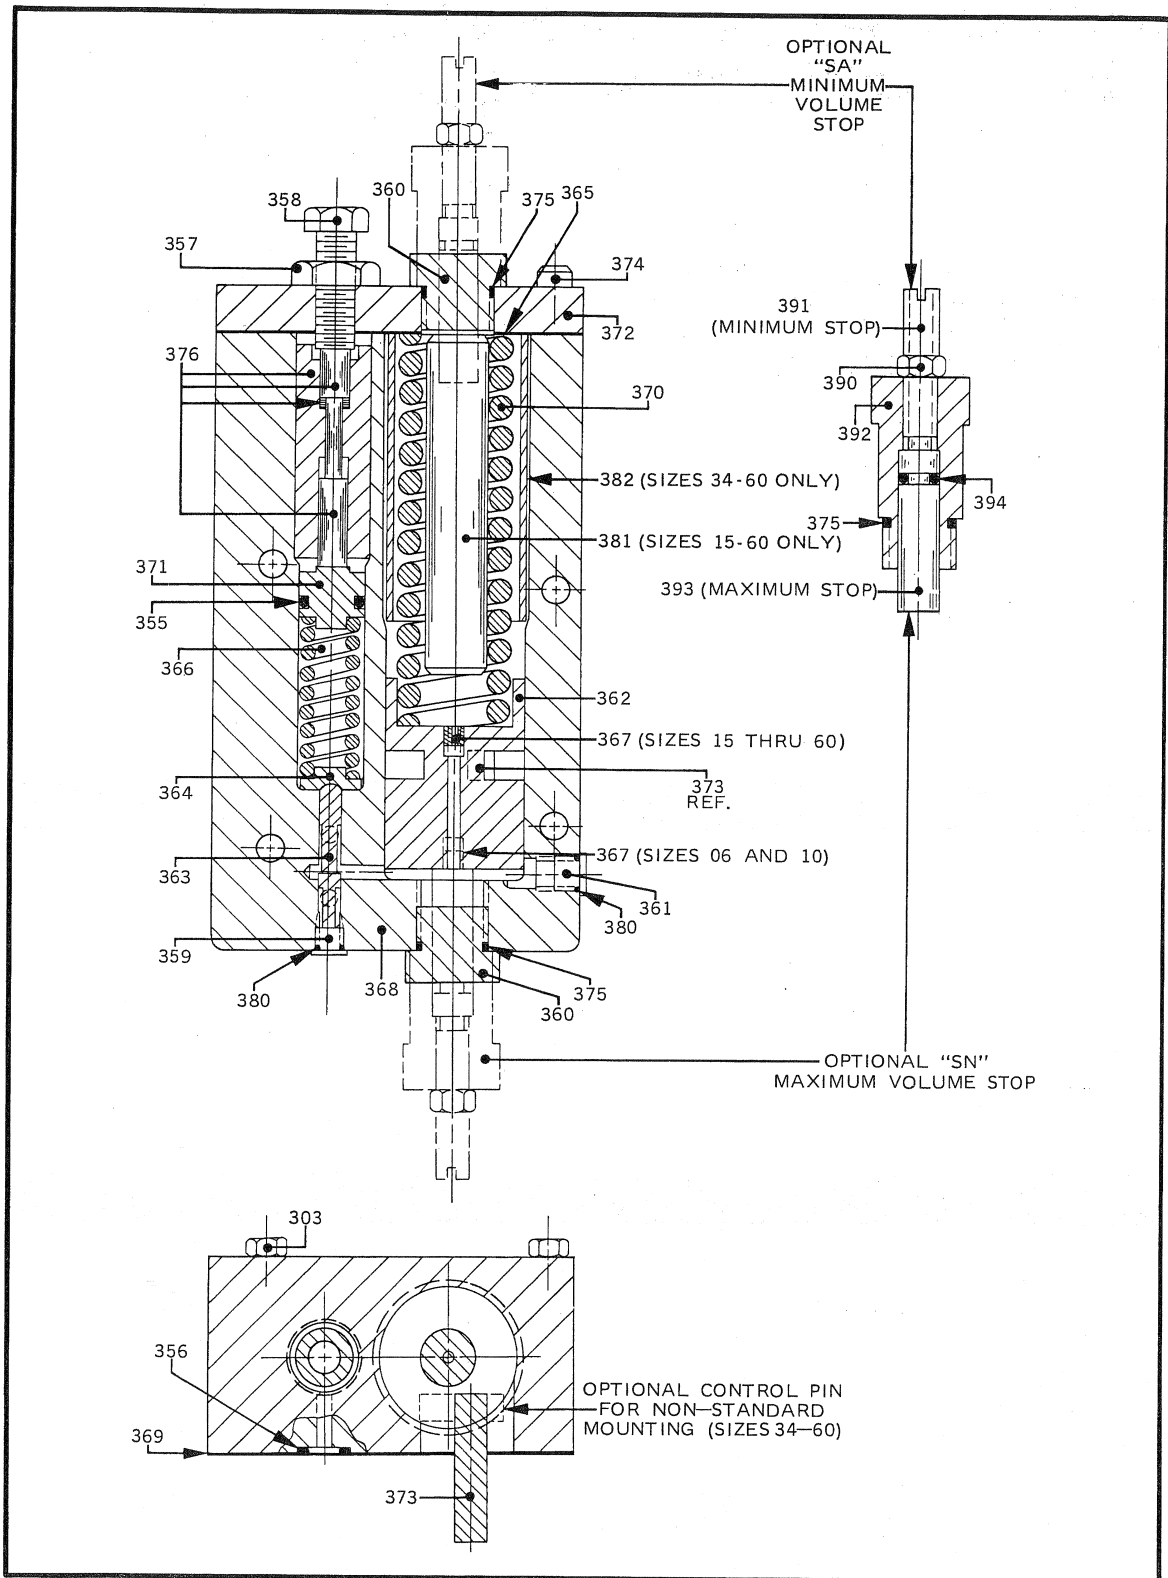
Parts drawing, HYDURA type "CN/CL" control (509820-B).
